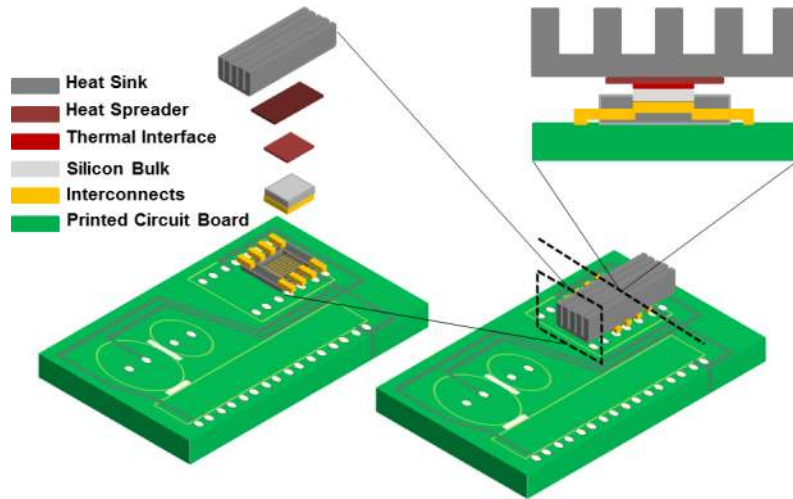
Typical IC packaging components in a ceramic ball grid array (CBGA) package disassembled (left), assembled (right), showing a cross section of the PCB, chip, and different thermal layers up to the relatively bulky heat sink.
